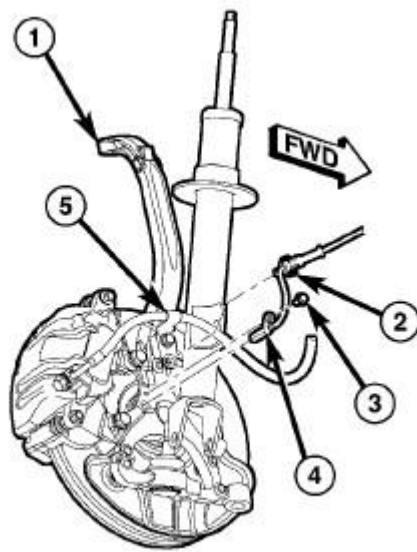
FRONT BRAKE FLEX HOSE AT CALIPER
